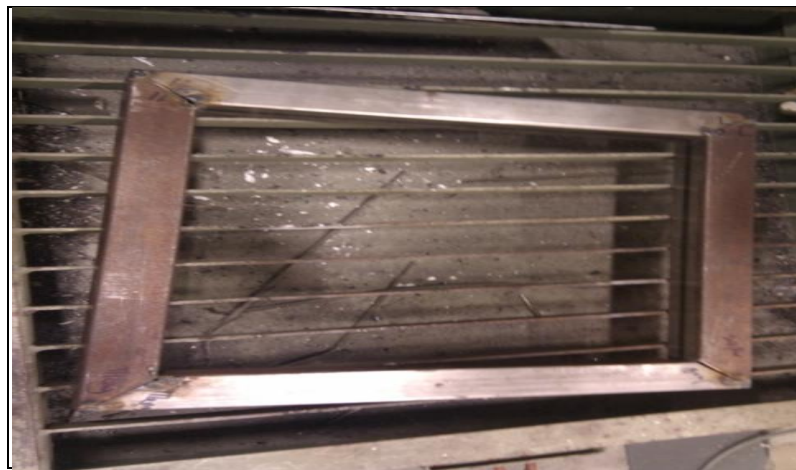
Example on hollow iron/steel after been welding
